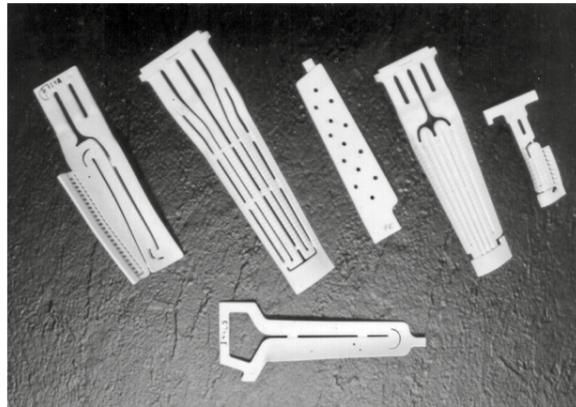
Examples of alumina casting cores, which meet the rigors of PIM manufacturing for aerospace and represent a large market segment
